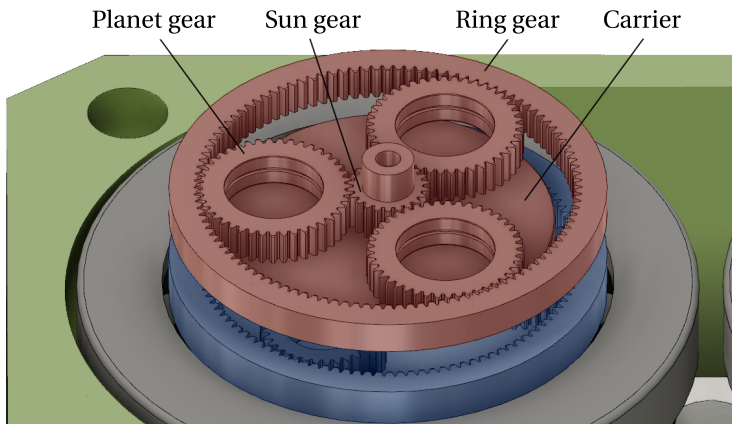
Cropped rear view of the electro-mechanical shear ram actuator with the gear housing removed, showing the planetary gear arrangement. The first planetary gear is highlighted in red color, and the second planetary gear is highlighted in blue color. Figure provided by ESD.
